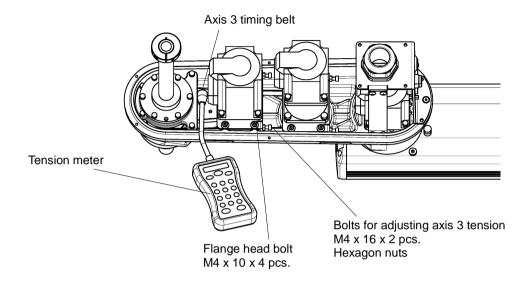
Adjusting axis 3 tension (KHL-500, KHL-600, KHL-700)
